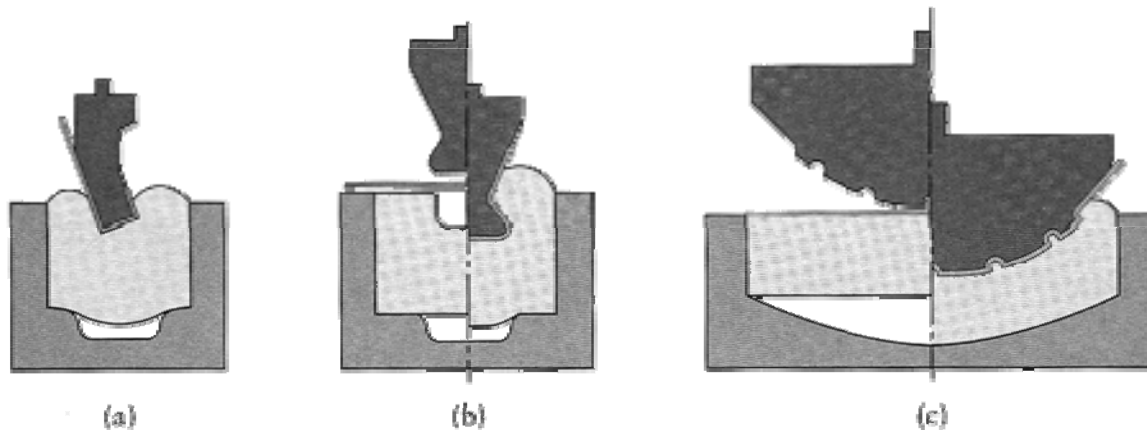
Examples of bending and embossing sheet metal with a metal punch and a flexible pad serving as the female die. Source: Polyurethane Products Corporation.
